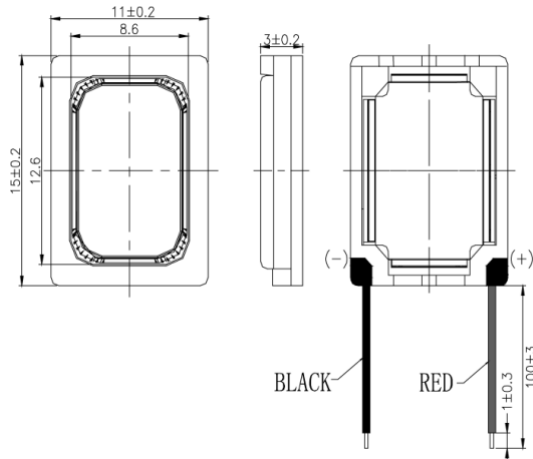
CUIDevices CMS-15113-078X-67 Datasheet [cont.].
